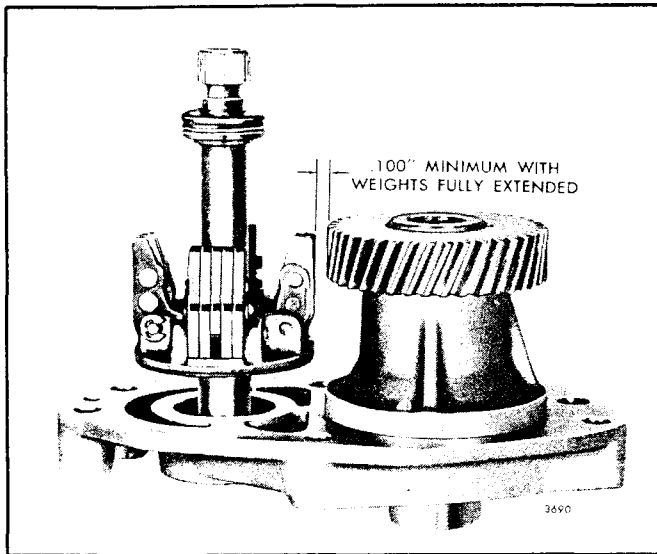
Minimum Clearance Between Blower Drive Gear and Governor Weights
